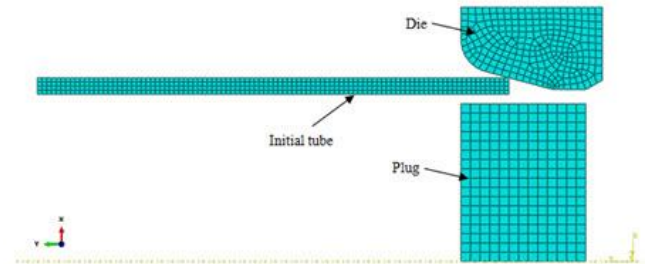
Meshing of axisymmetric tube drawing process with a fixed plug
